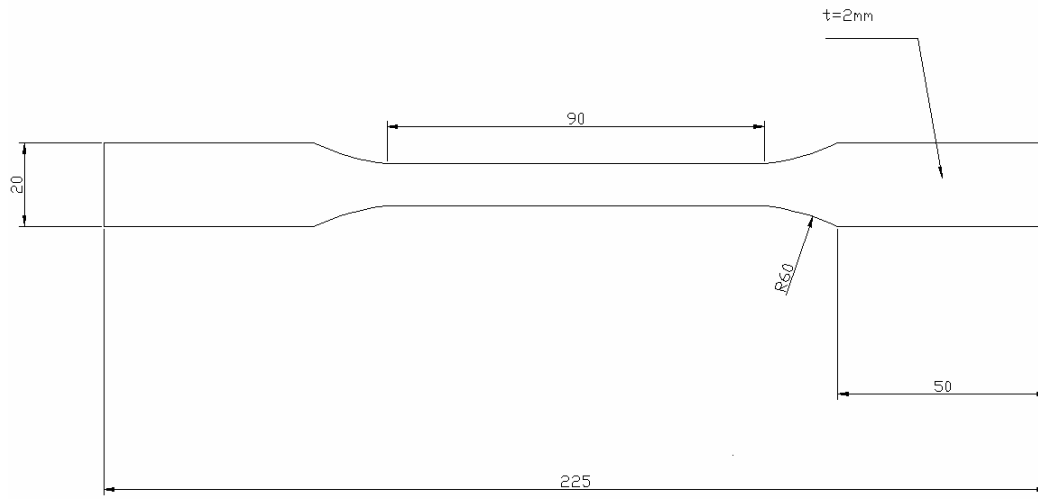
Dimensions of creep test epoxy specimen (all dimensions in mm)
